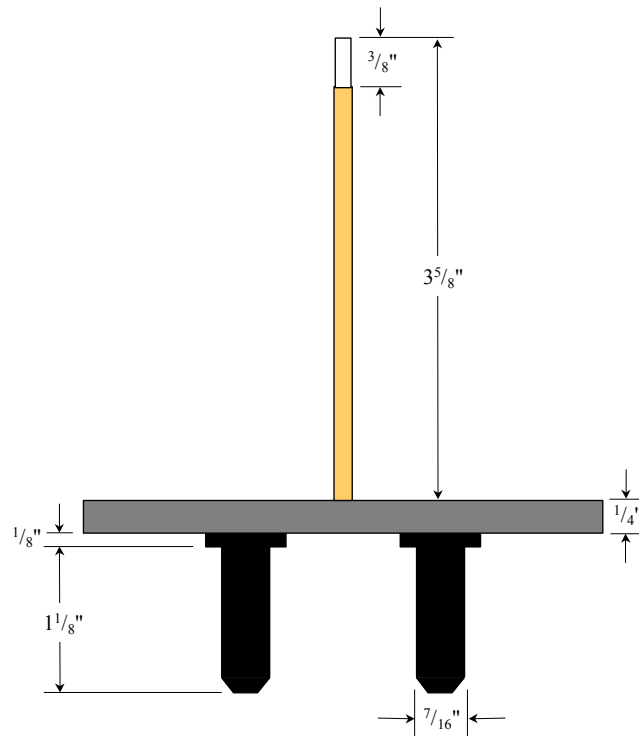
Dimensions of the "Dummy Lamp Gauge" used with the CG-2P.
